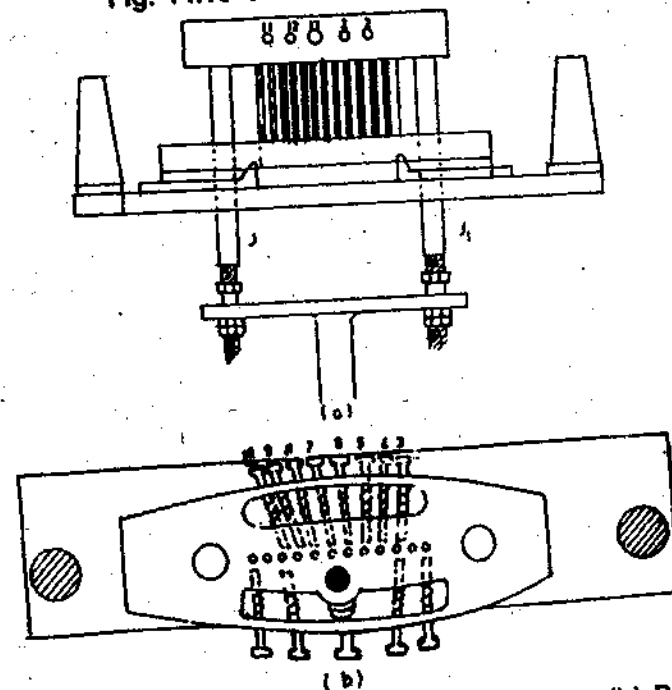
Card Cutting Head - (a) Front view, (b) Plan
